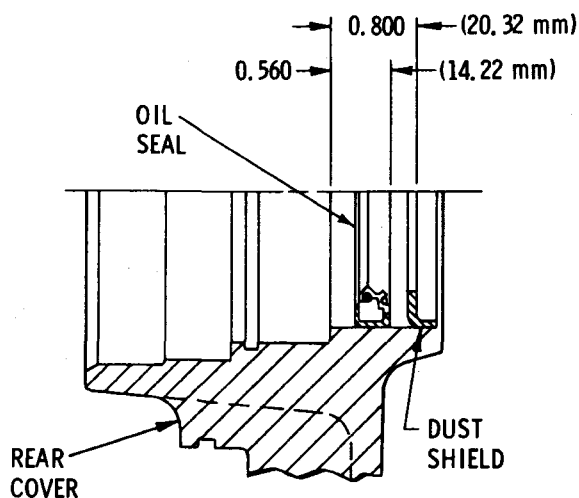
Oil and dust shield installation diagram for TTB model with PTO
